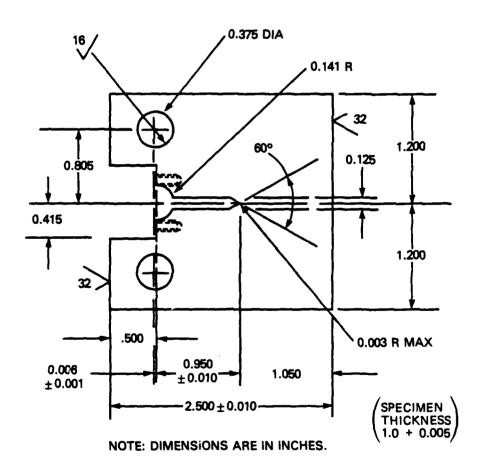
Modified 1-Inch-Thick (25.4-mm) Compact Test Specimen for J-Integral Testing
